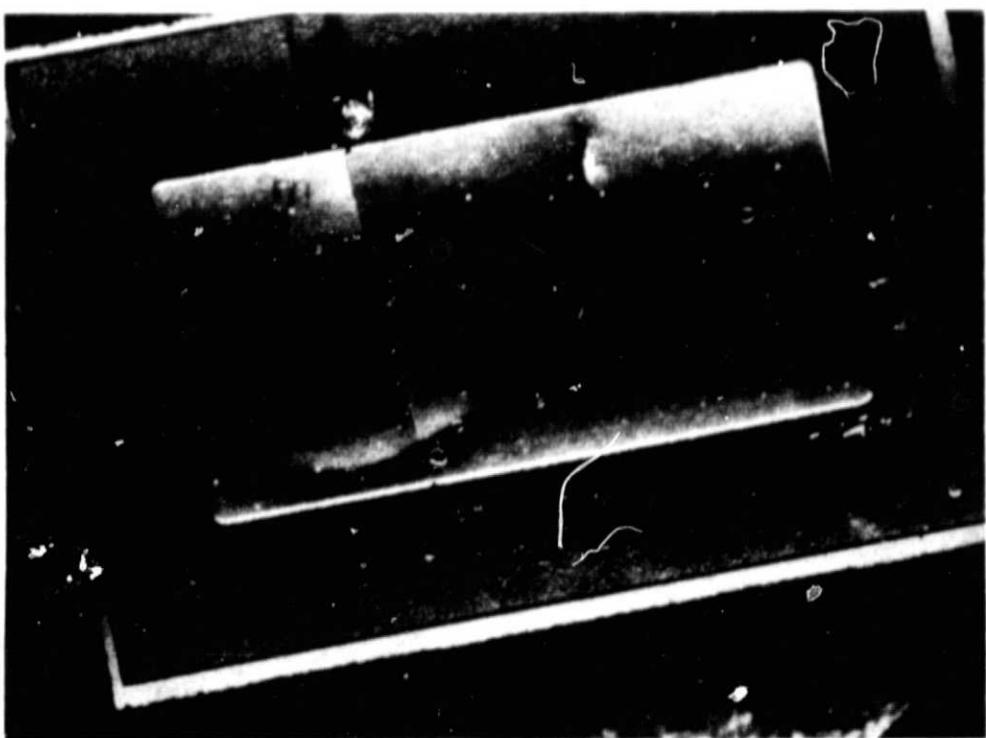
Diode fractured during die attachment around the brazed area.
